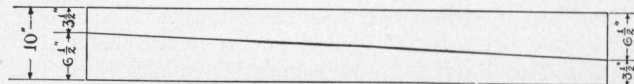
Showing How a 10-inch Plank is Cut Diagonally to Build Up the Centerboard to the Proper Shape
